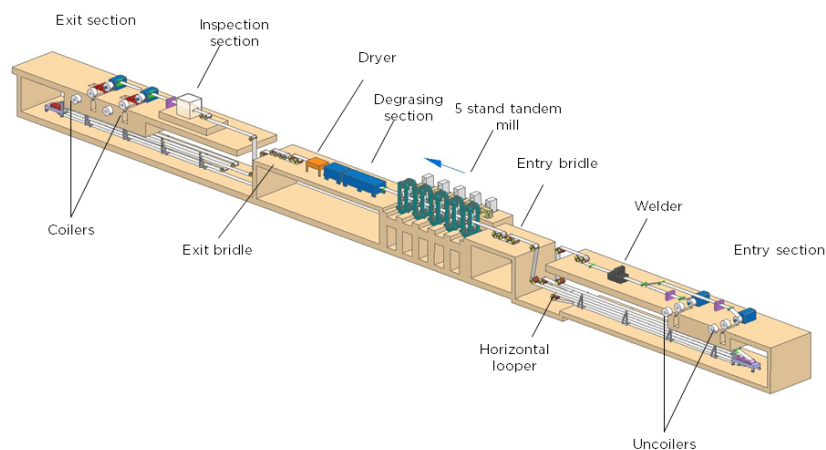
5 stands Power X-HI CTCM with laser welder
